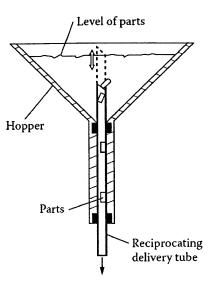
A reciprocating tube hopper feeder. The feeding tube moves vertically to allow parts to into the tube for delivery. [22]
